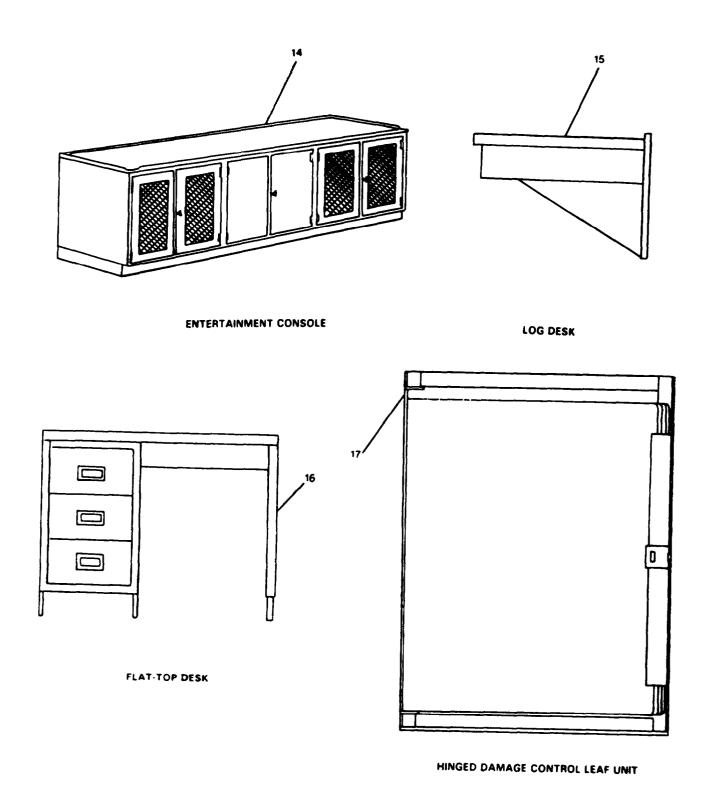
Furniture and Fixtures (Sheet 4 of 14).
